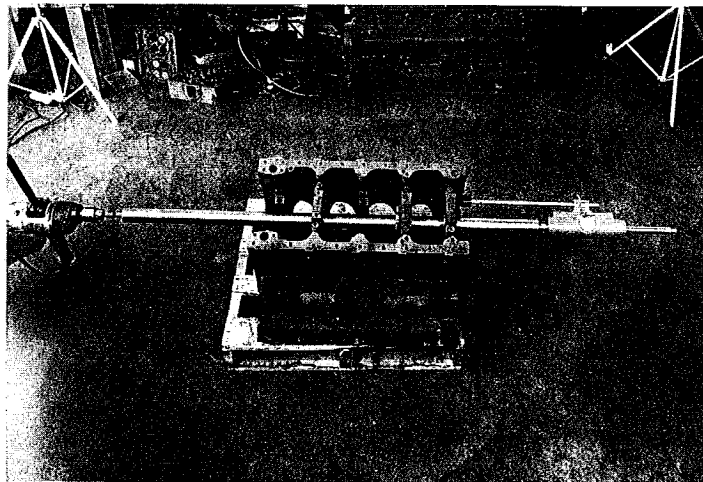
Torsion Bar/Bracket Mounted on Engine Block
